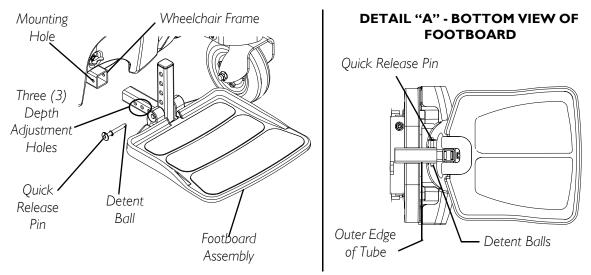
ADJUSTING THE FOOTBOARD ASSEMBLY - DEPTH
